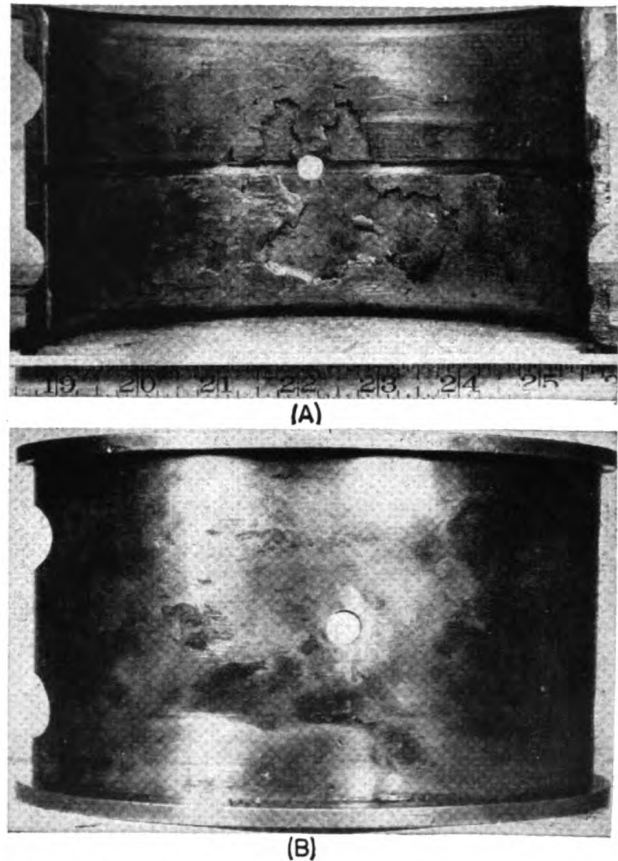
Bearing failure caused by faulty installation.
